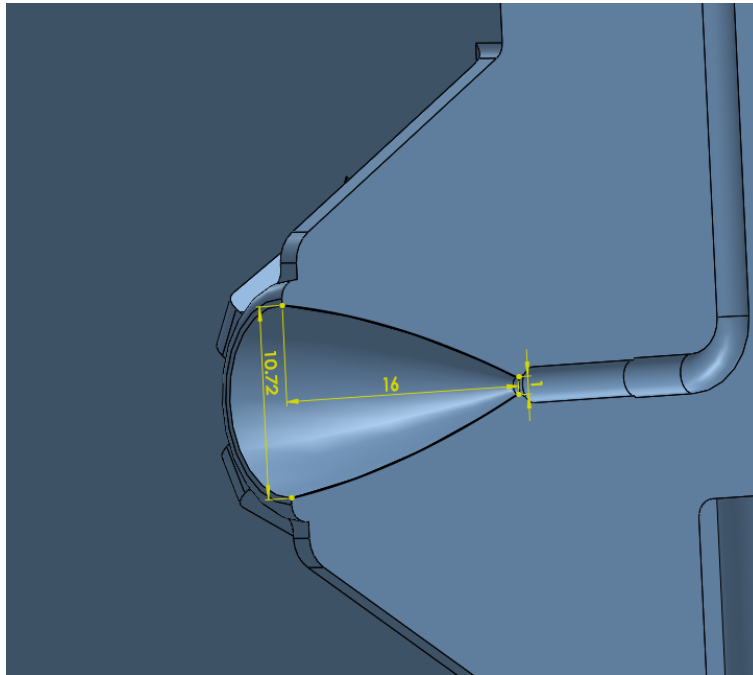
Cutaway view of the Prox-1 thruster nozzle, showing the feed pipe, throat, diverging section, and four of the six nozzle supports. Dimensions are in millimeters, showing the exit diameter, throat diameter and nozzle length.
